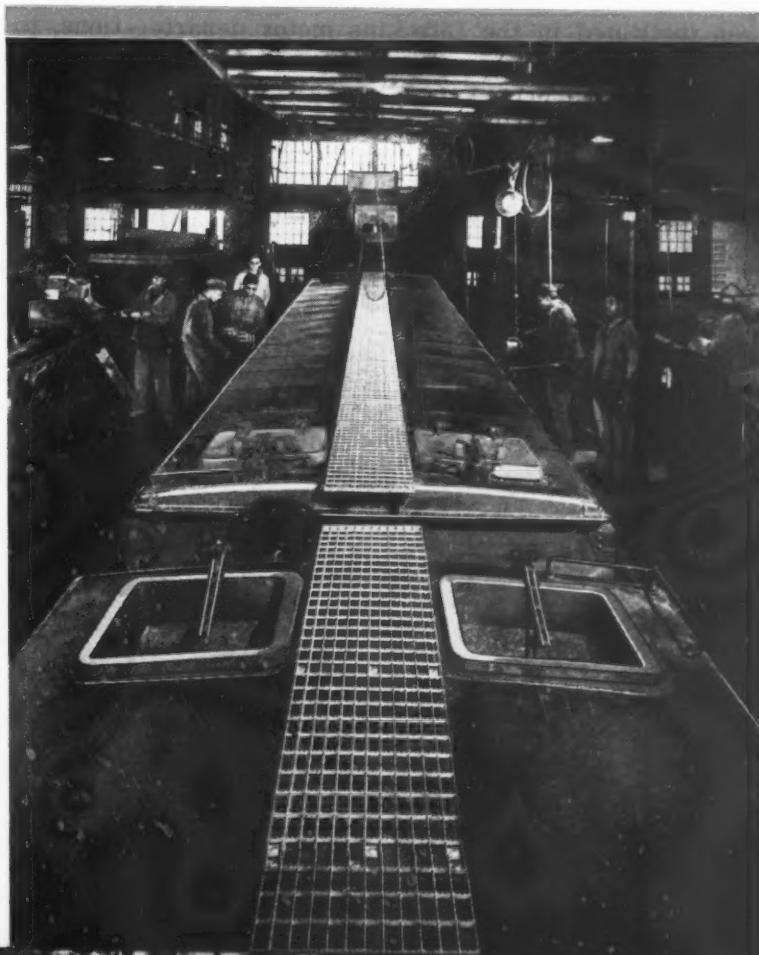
A Positioner is Employed for Welding the Surfaces on the Under Frame that Cannot be Held Horizontally in the Two Jigs Used in Preceding Operations
